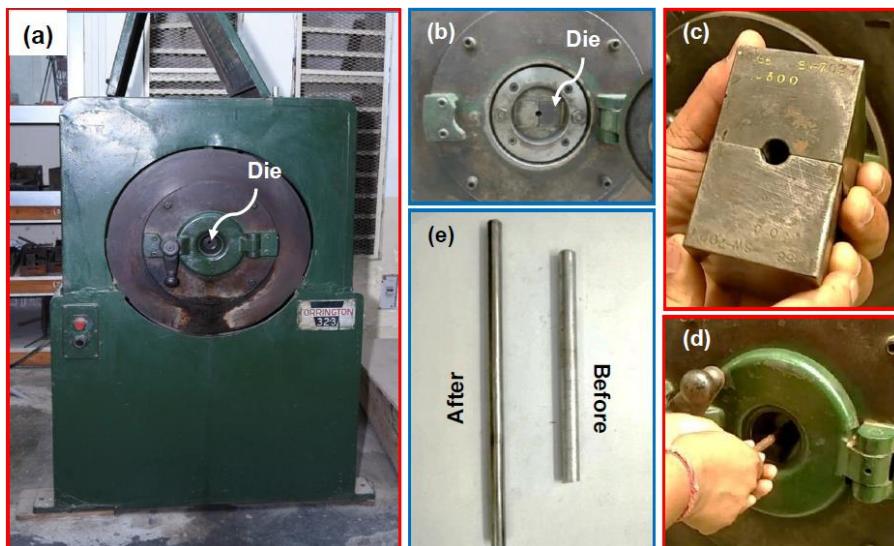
(a) Swaging machine, (b, c) magnified versions of die, (d) swaging process, and (e) sample before and after swaging process.
